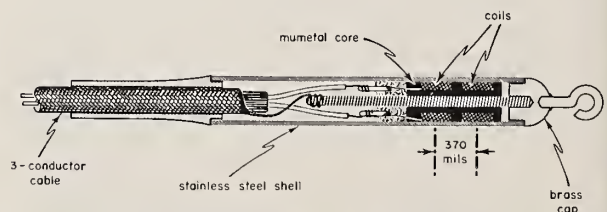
Search-coil assembly for the "Probolog" condenser-tube tester.
